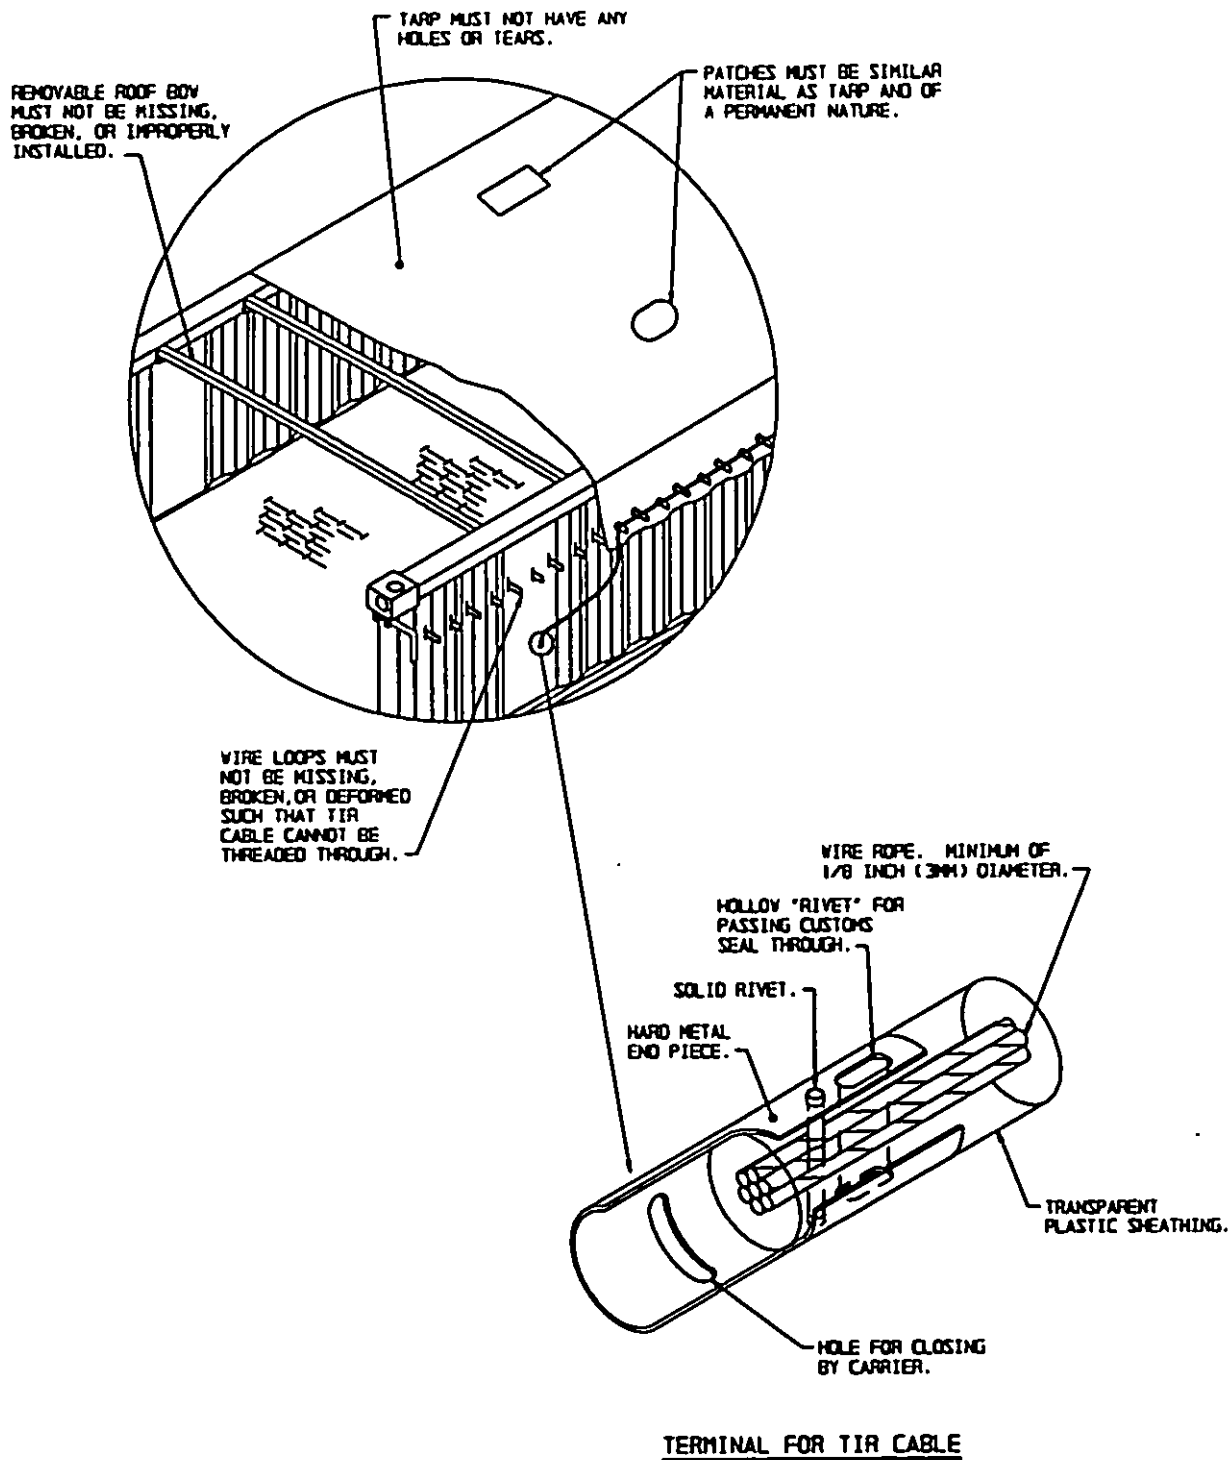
REMOVABLE COVER (TARP) ASSEMBLY
